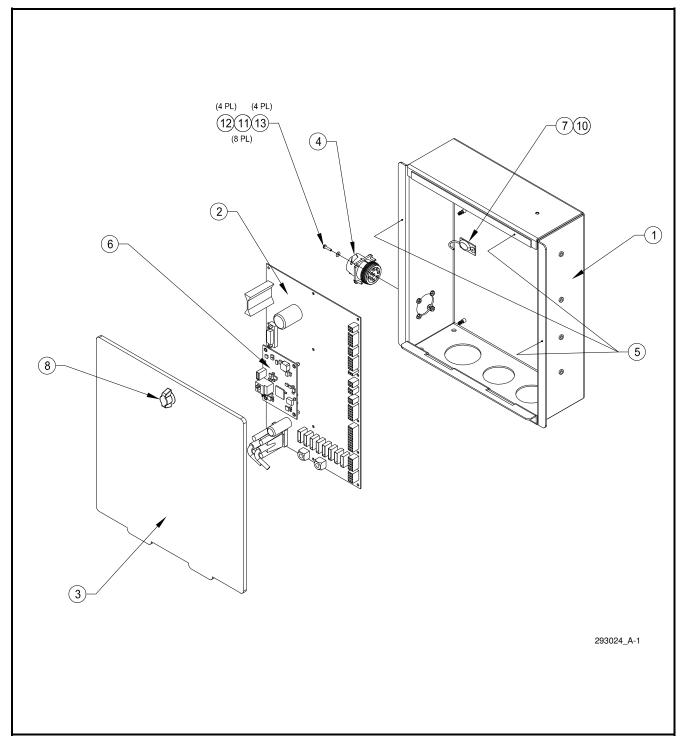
Control Module Box Assembly (Sheet 1 of 2).
